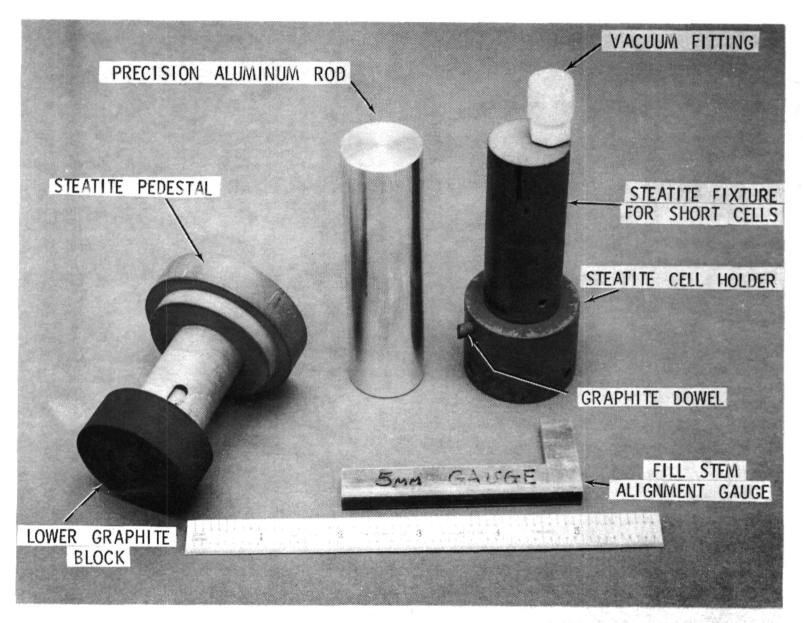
ALIGNMENT GAUGES AND HOLDING FIXTURES
